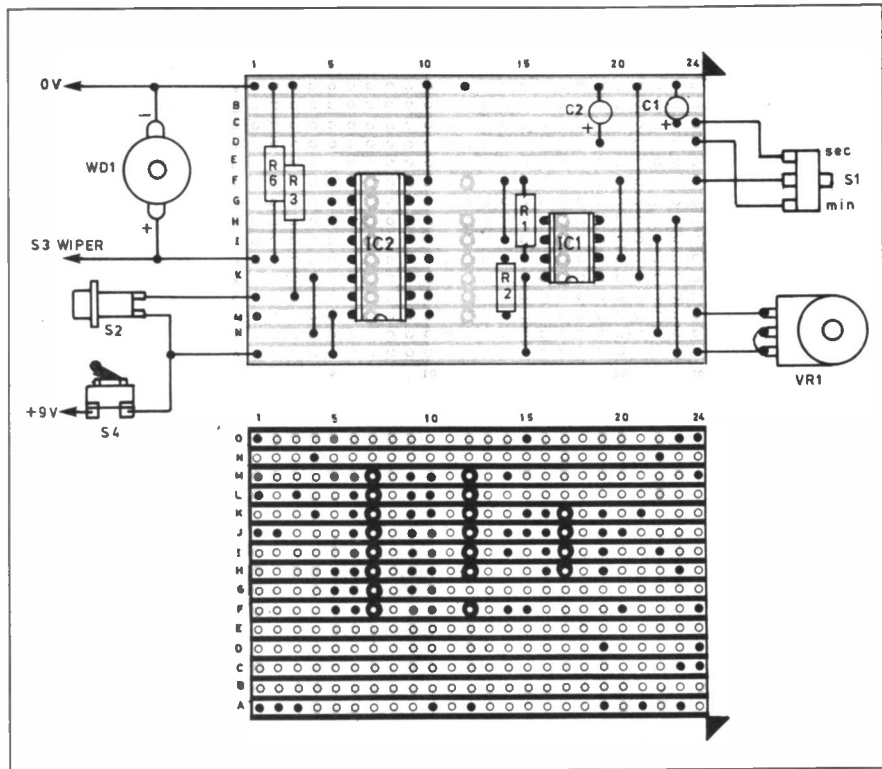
Topside component layout and underside stripboard track cuts and solder joints for the Games Timer.
